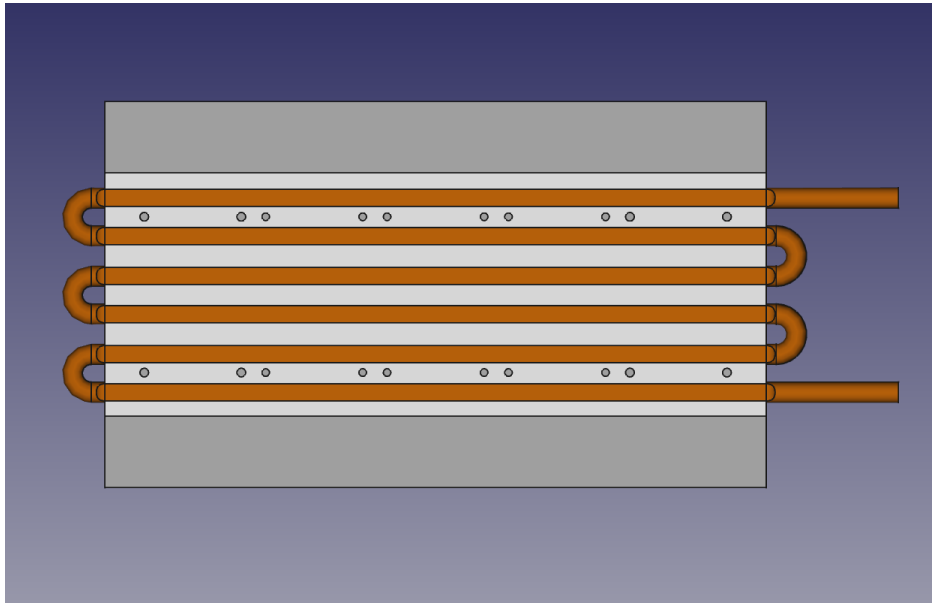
Cold Plate with Mounting Holes and Shaded Area Indicating Material Removed
